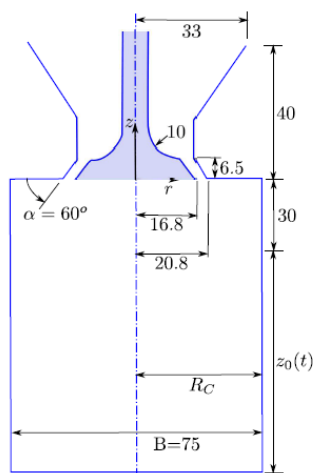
schematic of the single valve-piston assembly geometry [57].
